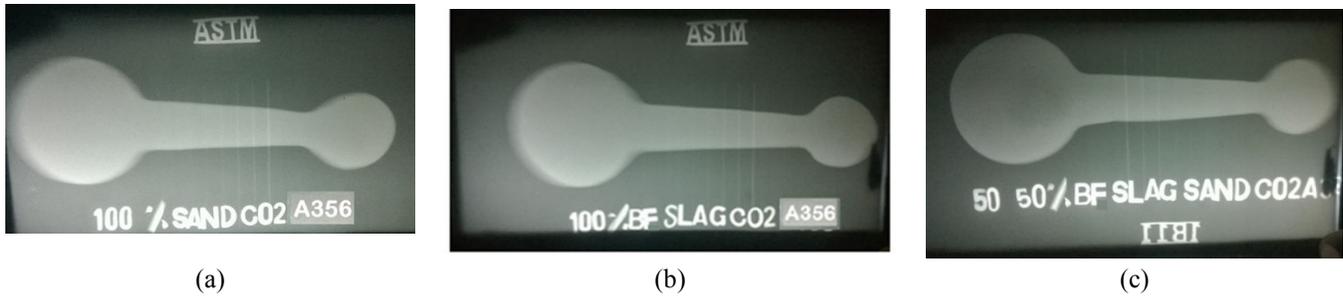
Radiography testing images of A356 alloy Connecting rods made in: (a) 100% Sand mould (b)100% GBF Slag mould (c) Mixture of 50% GBF Slag+50% Sand mould
